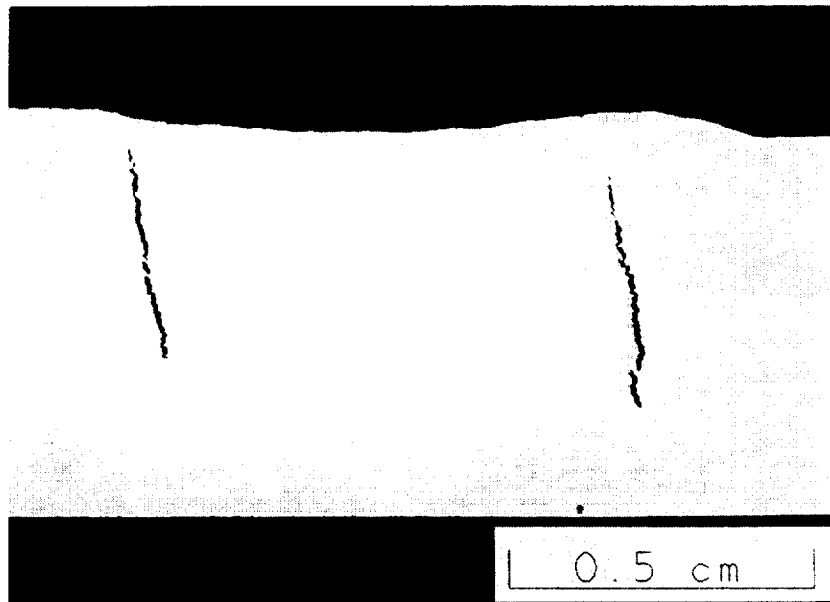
Sub-surface Cracking in a Tangential Weld Section -
